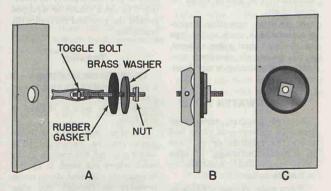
Closing a hole in a tank: A, The link of the toggle bolt is passed through the hole in the tank (hole is enlarged if necessary). B. Side view of tank edge (nut is drawn up tightly to compress washer and gasket against tank). C, Outside view of completed repair.
